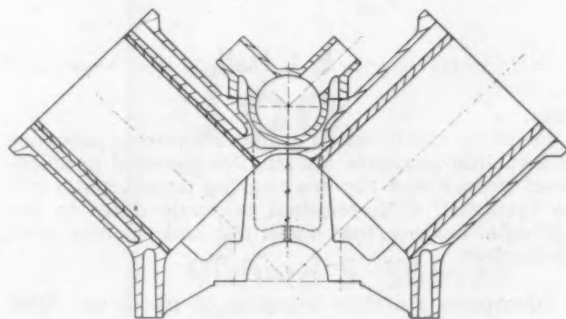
V-8 engine design with gray-iron sleeves cast-in as inserts (2 versions).
